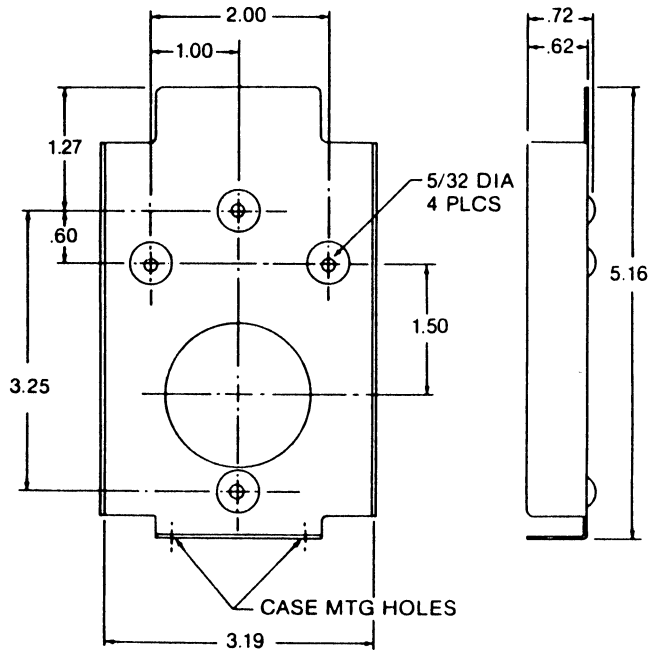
Surface Mounting Bracket Dimensions. MO/5
